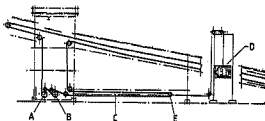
B18 conveyor drive and gravity take-up arrangement.
